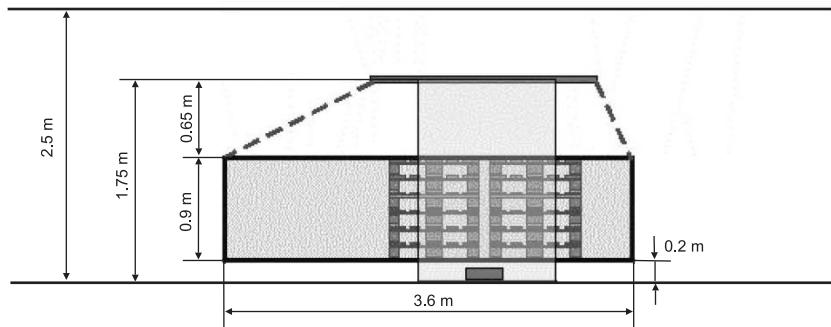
Side view of the passenger vehicle fuel package
